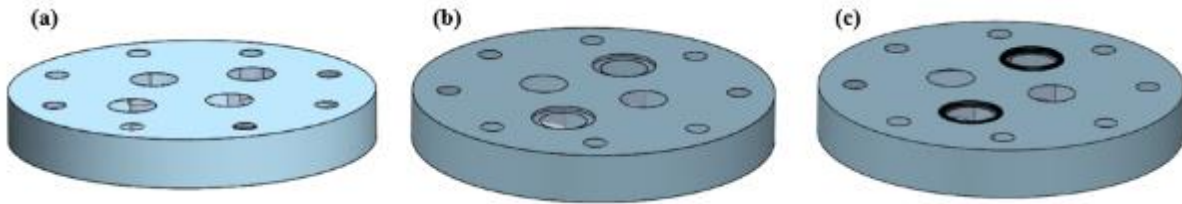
(a) Top view of the cover CAD model. (b) Bottom view of the cover CAD model, without O-rings. (c) Bottom view of the cover CAD model, including O-ring placement in the grooves.
